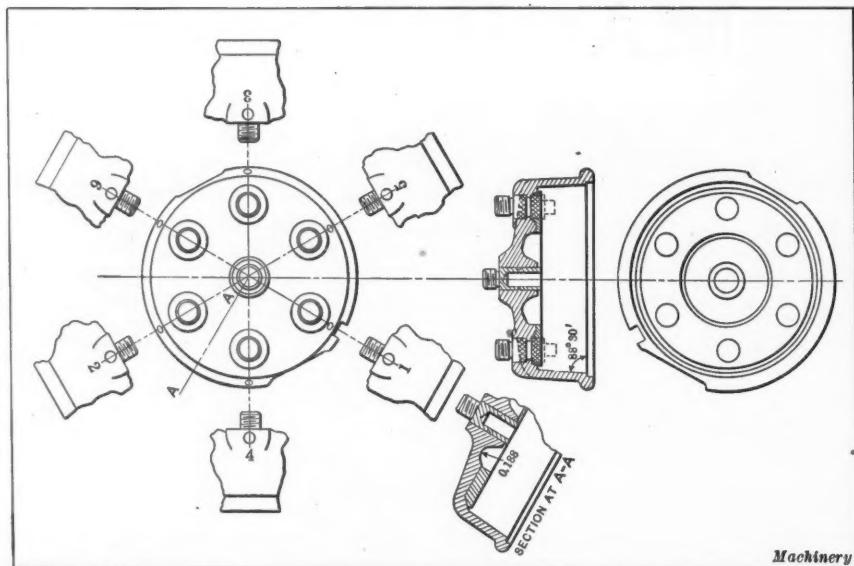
Distributor Head for Automobile Ignition System. This Head is molded from Bakelite
